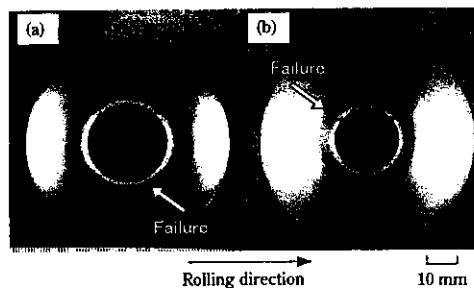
Appearance of test pieces after stretch flanging test, (a) newly developed stainless steel, (b) conventional stainless steel
